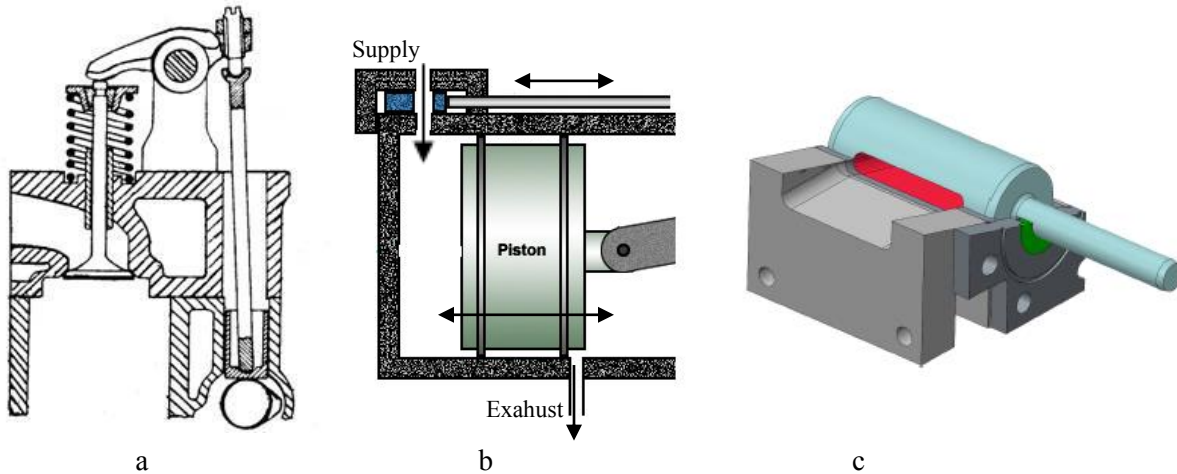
Types of valve: a) poppet valve, b) supply sliding valve and piston-controlled exhaust port, c) rotary valve (Wronski 2015)
